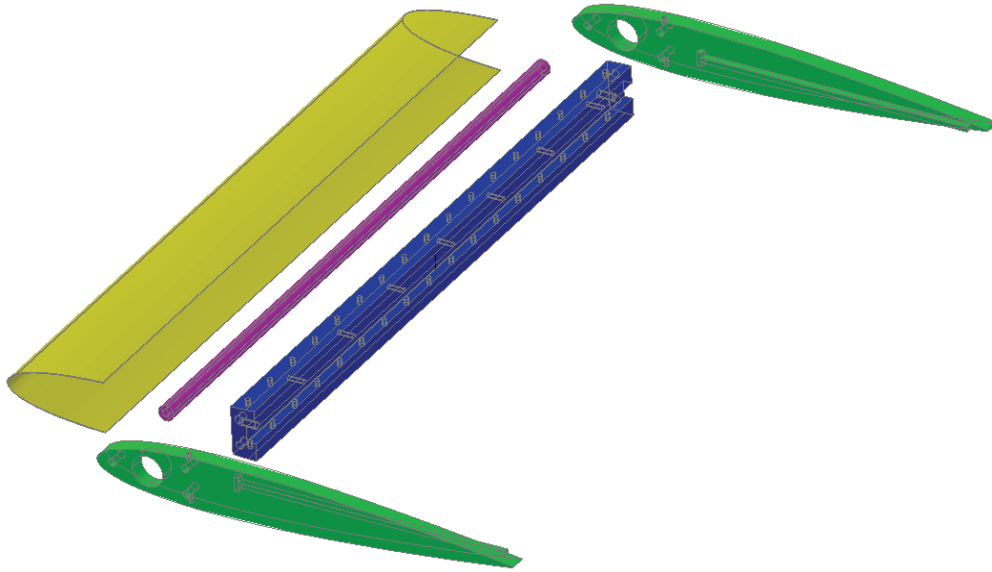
Exploded view of the CAD model for the experimental prototype: lateral supports in green, front spar in blue, tubular stiffener in magenta and leading edge skin in yellow.
